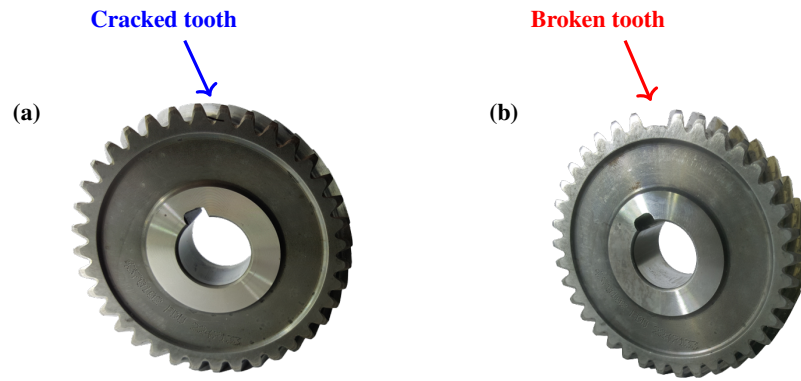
Helical gear in the C-AIM experimental test rig (a) gear with 50% cracked tooth representing incipient fault, and (b) gear with broken tooth representing matured fault [51].
